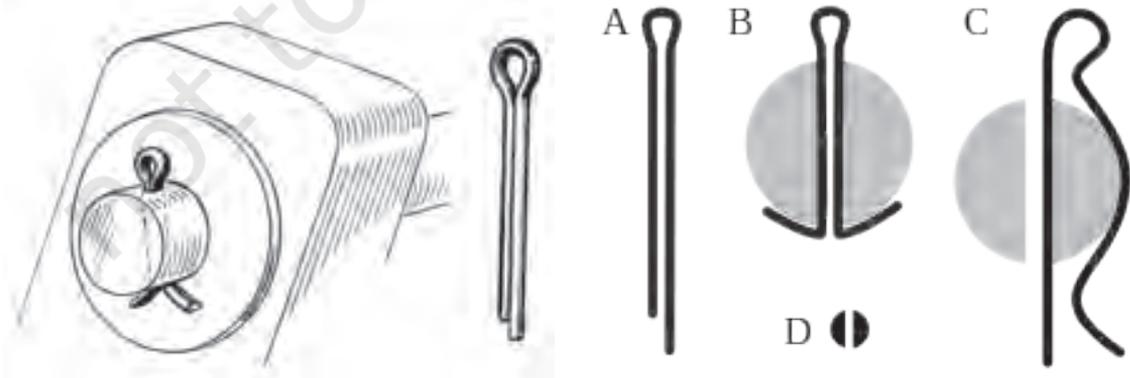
Split pin in shaft. A-new, B-installed, C-spring type, D-cross-section
